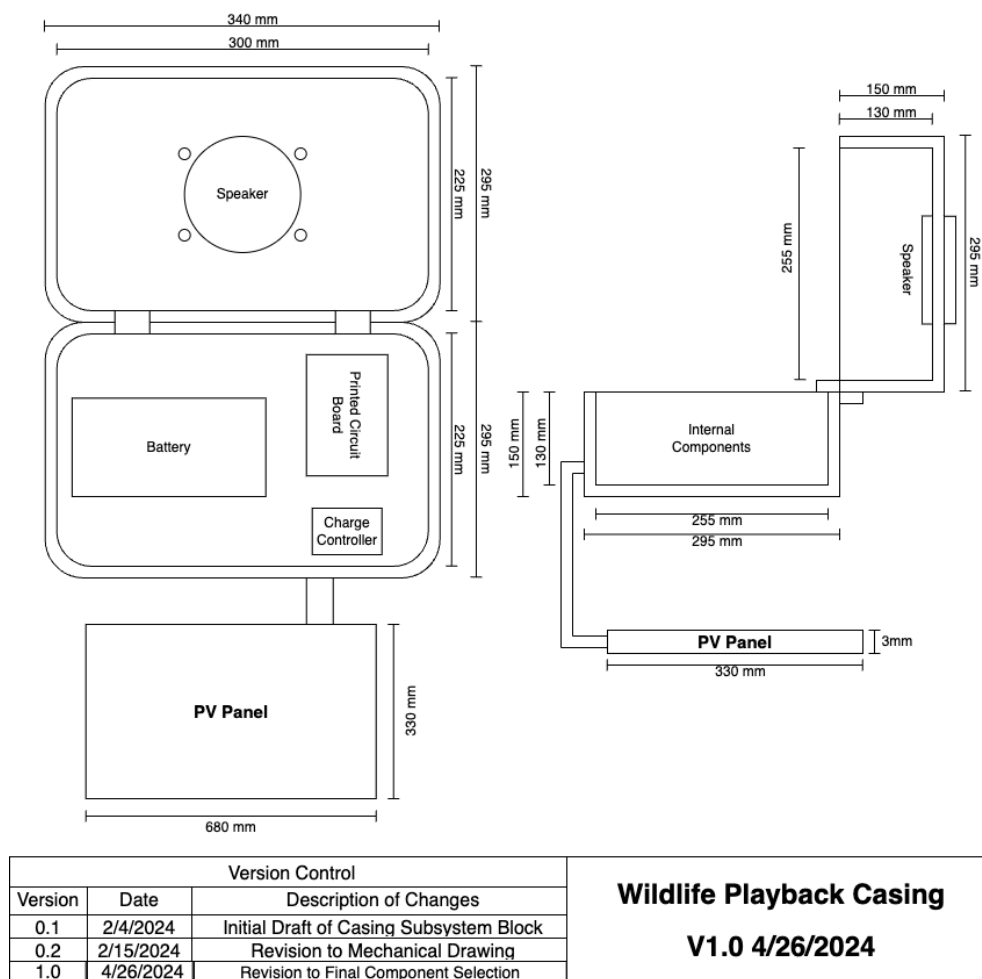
a: Mechanical Drawing of Packaging System
